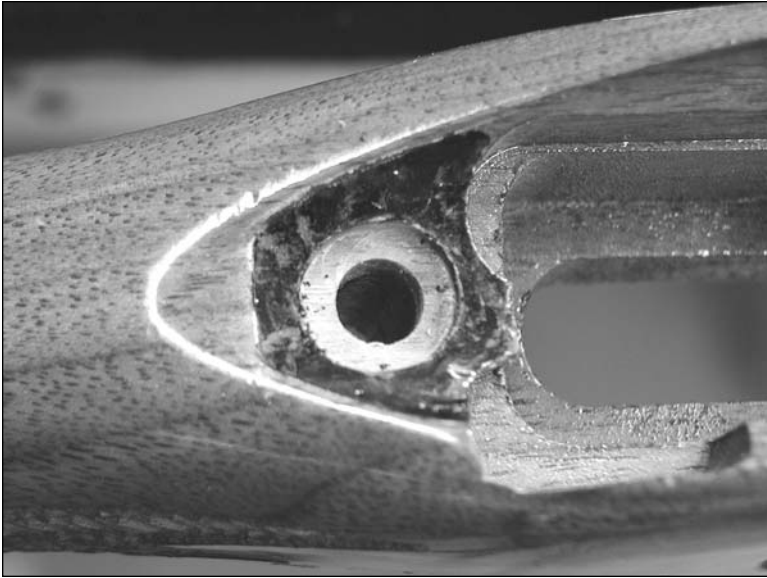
A: Relieve area immediately around screw hole, to a depth of about 1/8" (.125). If you want to be really neat, you can use a drill, flat milling cutter, step drill or counterbore.
